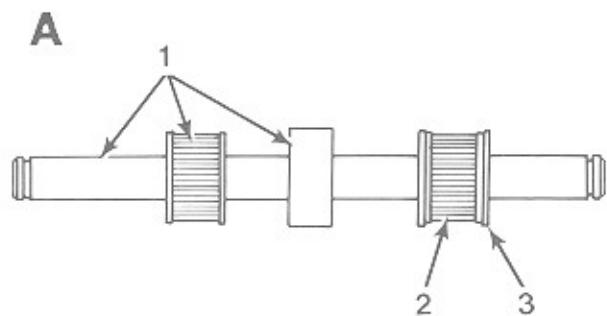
OBA—4 Transport Roller And Shaft Assemblies
